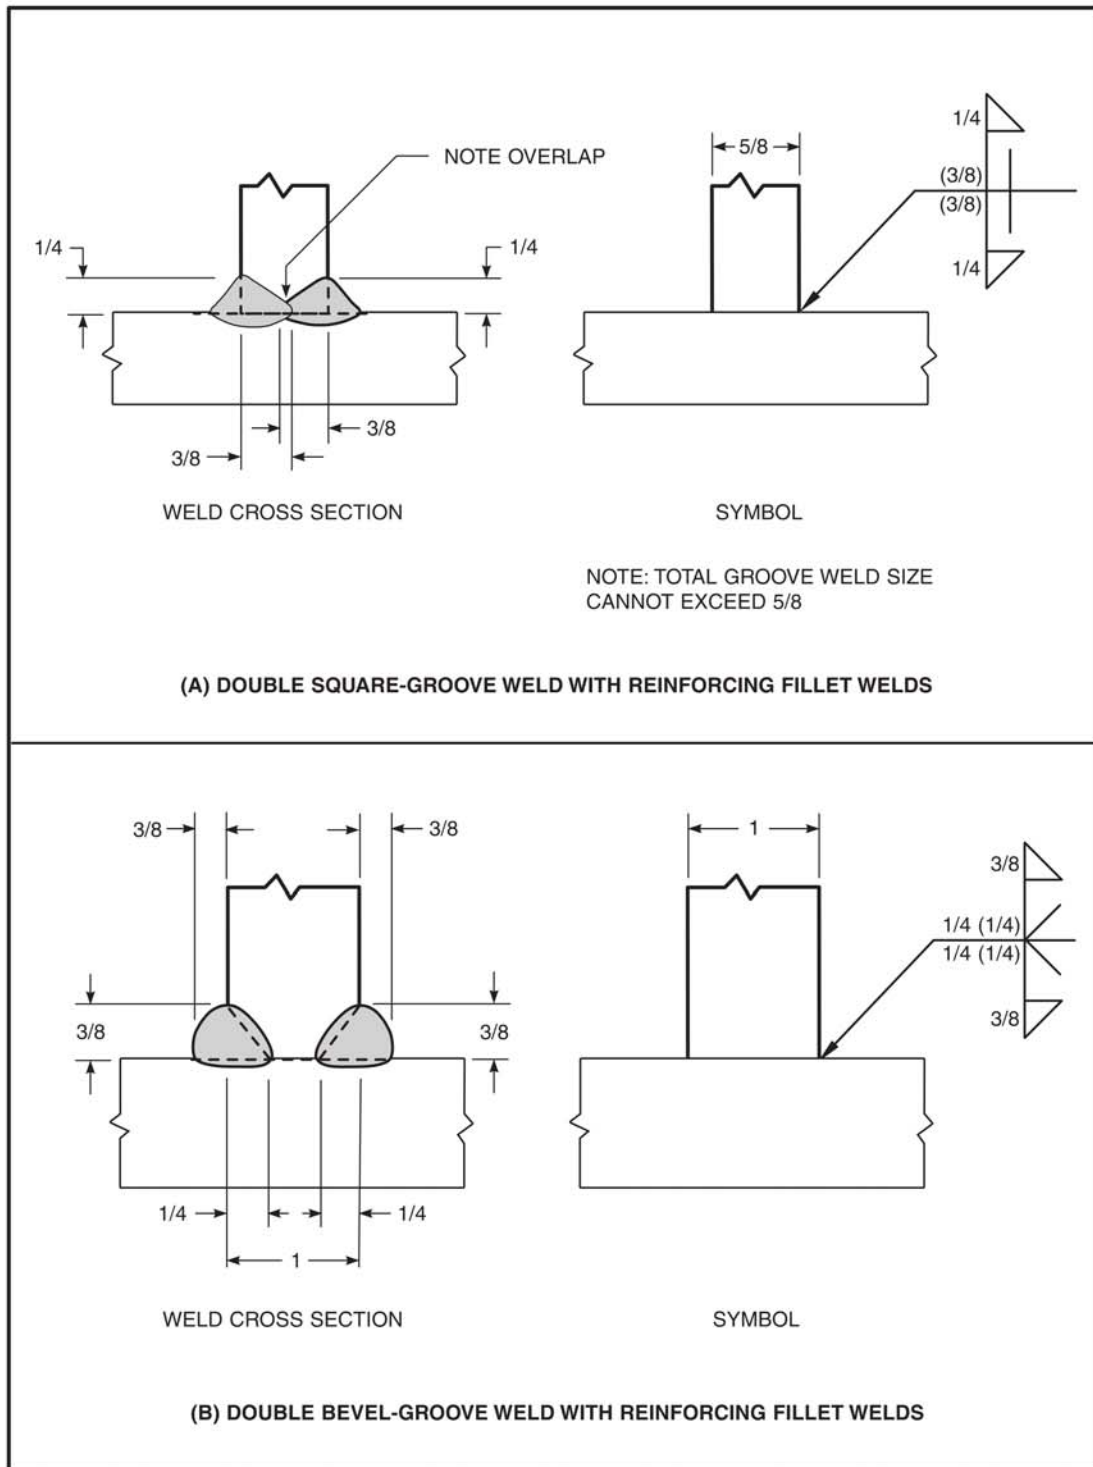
Application of Symbols for Combined Groove and Fillet Welds
